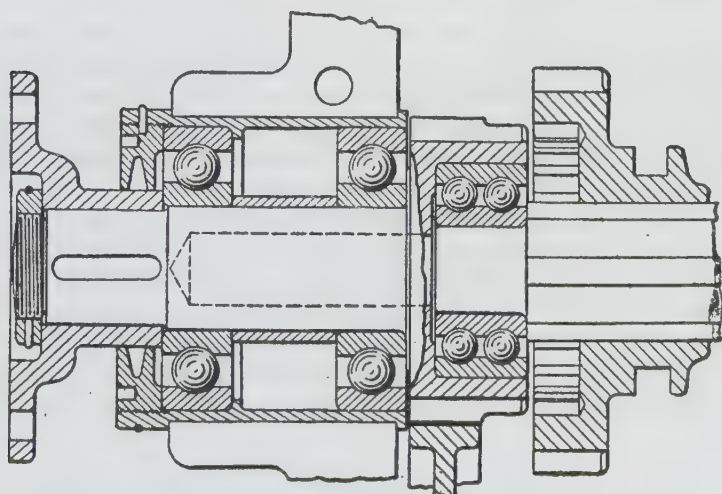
DIRECT DRIVE SPUR AND INTERNAL GEAR CLUTCH.
